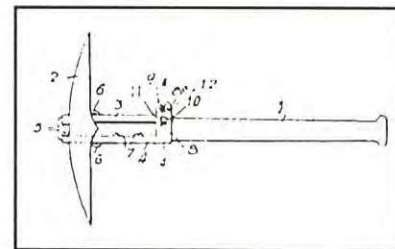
This sleeve for coal picks is a mechanical version which clamped around the end of the handle and featured a locking hasp secured with a bolt. Ashbell Willard patented this in Benton, Illinois in 1917. (Pat 1,248,993) ✕
